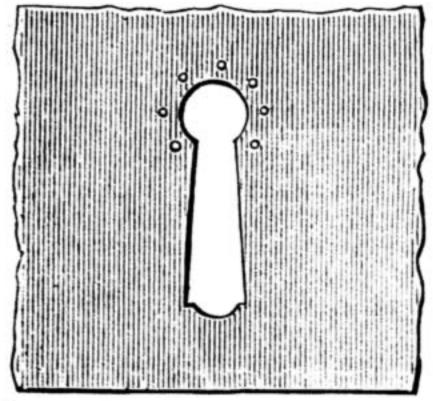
Mode of Repairing Worn Keyhole by Enlarging Hole.
